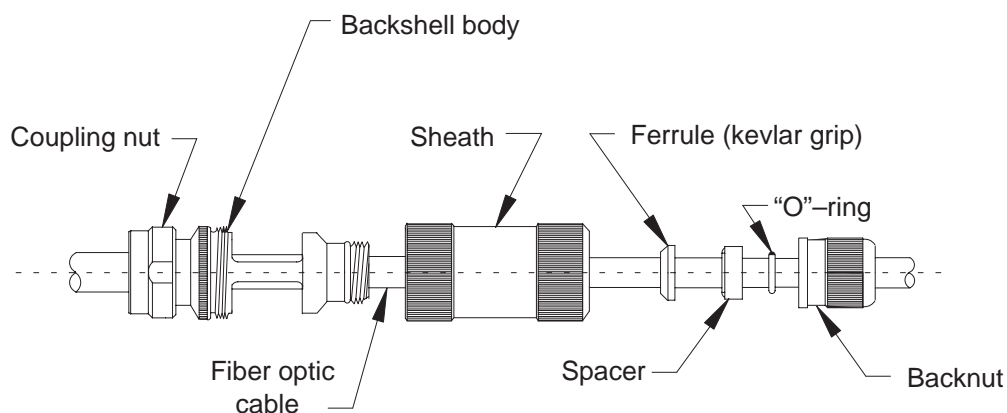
Backshell Parts on the Cable (Straight Backshell)
